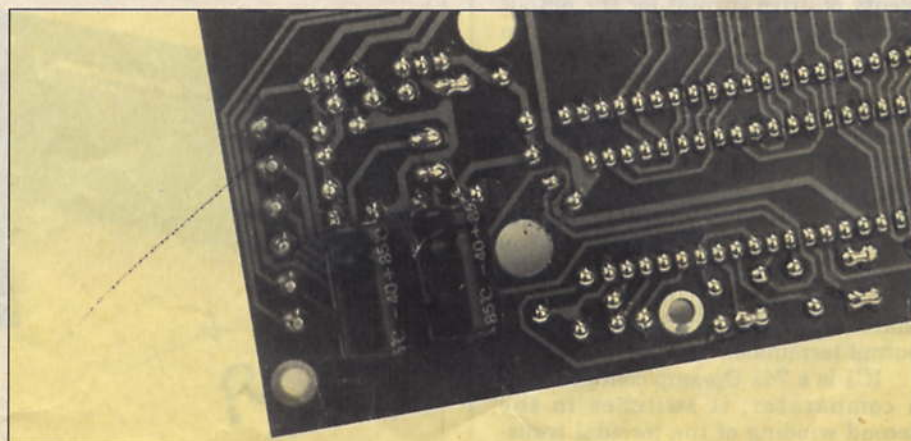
C15 and C16, shown fitted on solder side of PCB.
